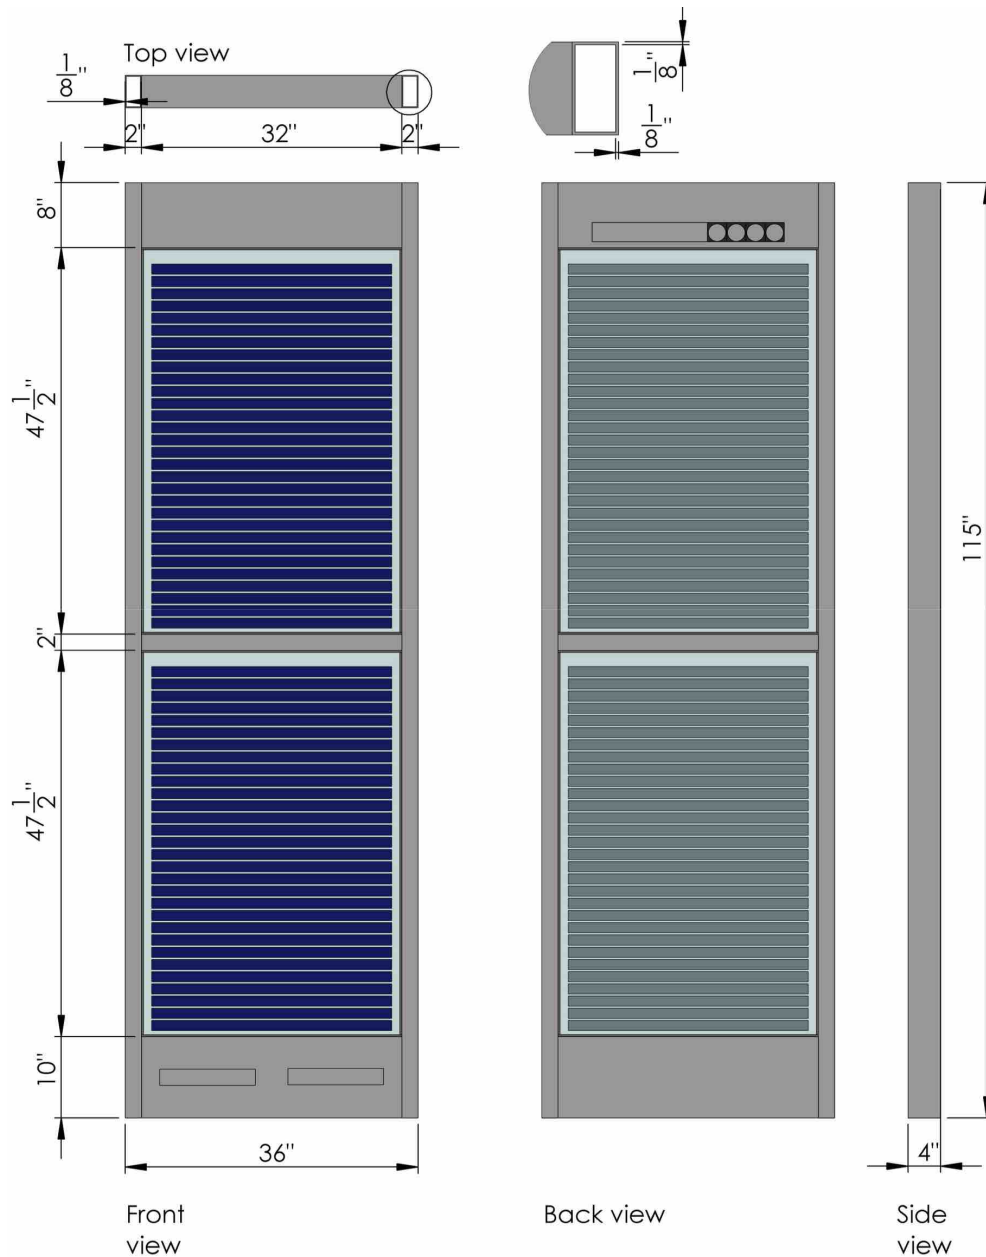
Frontal, rear and side view of Prototype 1.
